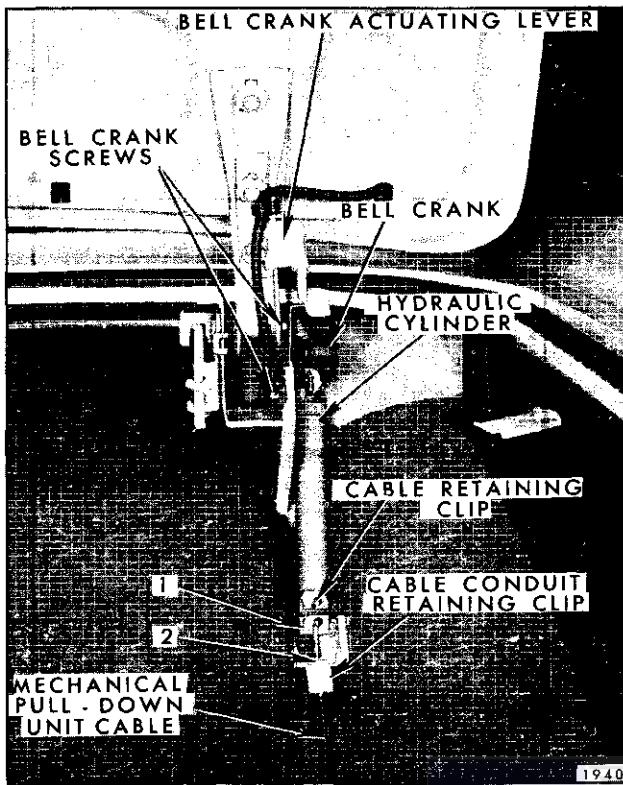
Mechanical Pull-Down Unit Hydraulic Assembly - Cadillac Styles with Option
